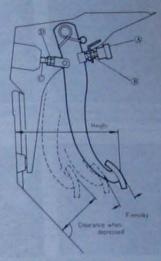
Brake pedal adjustment details (Sec 8)
